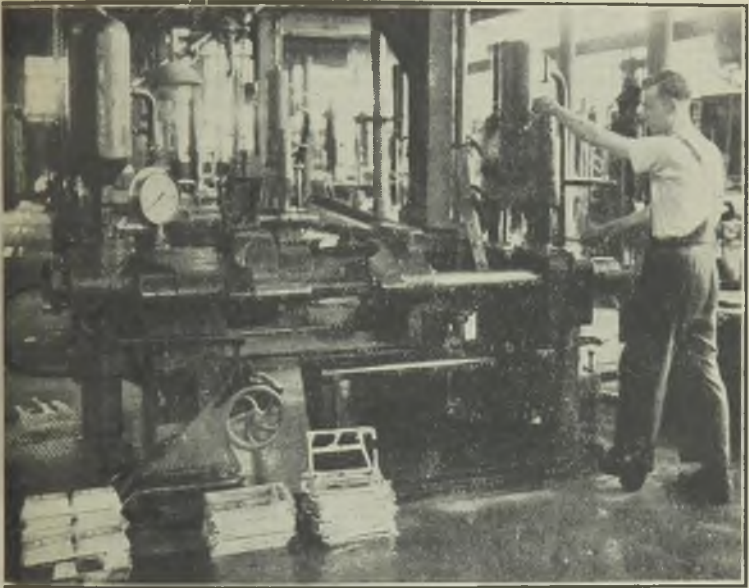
MEDIUM HYDRAULIC MACHINE FOR DIE CASTING—ONE OPERATOR.
